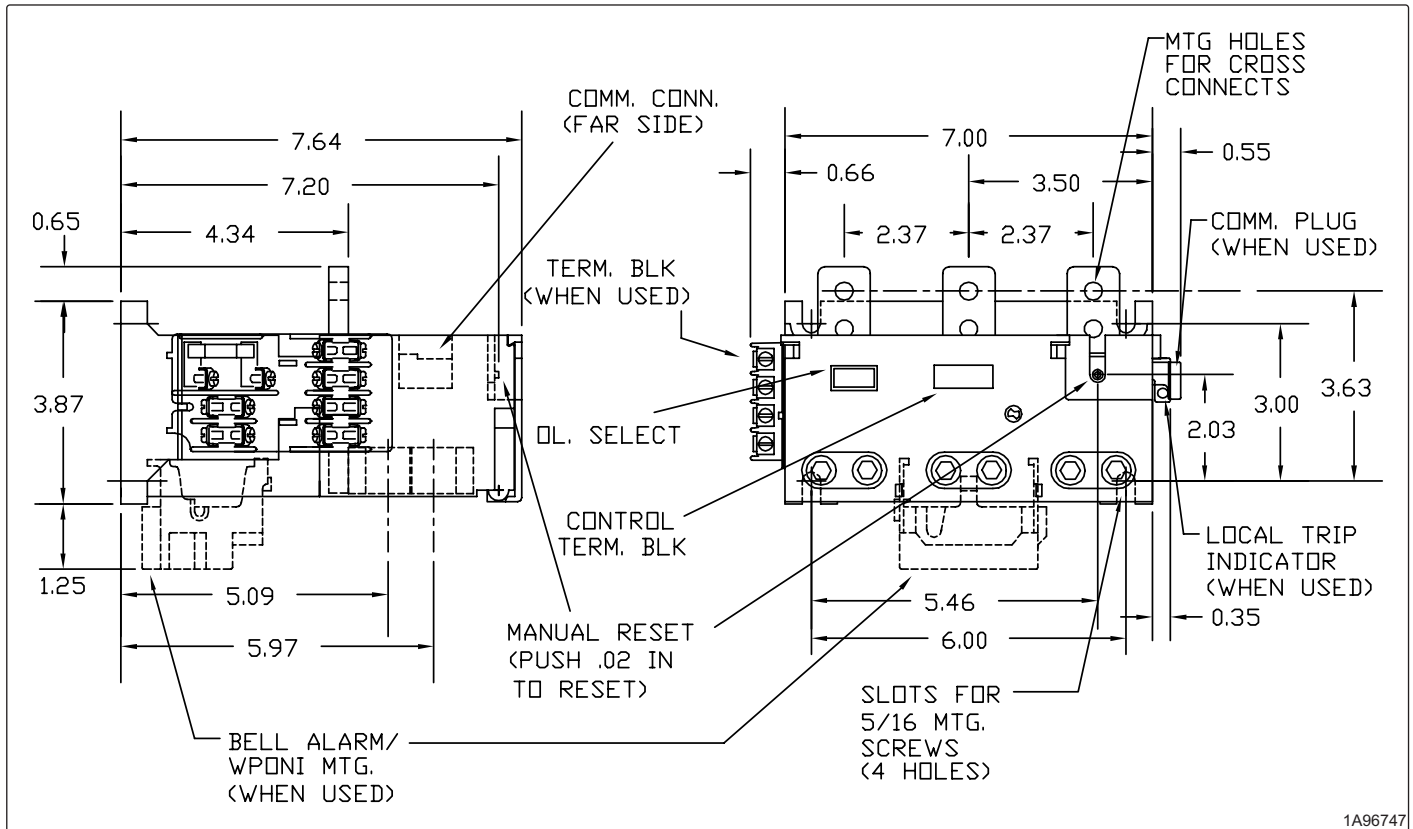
Size 5 and Size 6 Outline and Mounting Dimensions (dimensions in inches)
